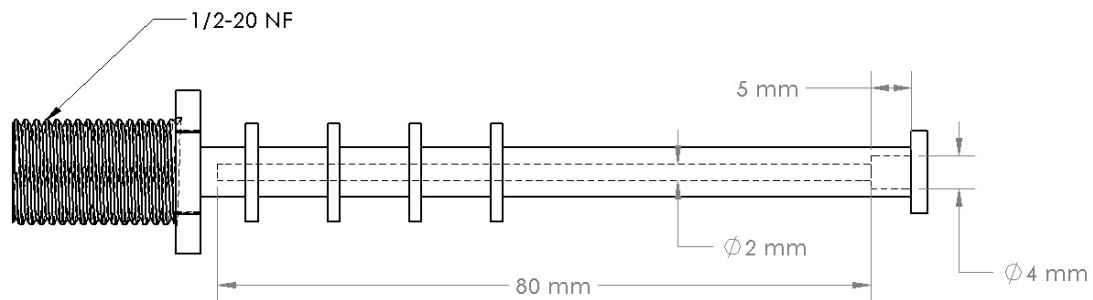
Schematic of 2 mm Single Miniature Radially Rotating Heat Pipe<sup>2</sup>
